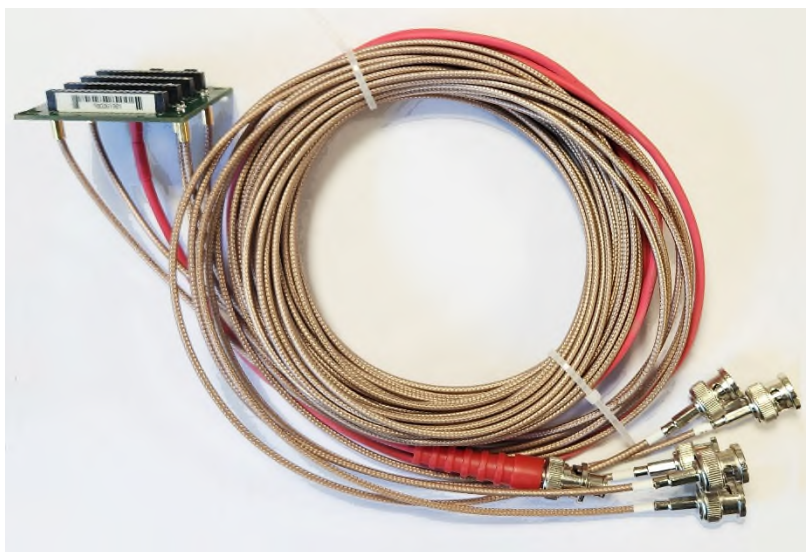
Complete Assembly with Hard-Wired Coaxial Cables
